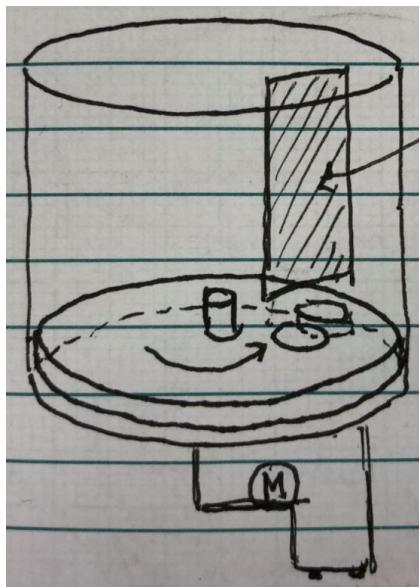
Drawing of the pill-dispensing cylinder. The motor attached to the bottom turns a disk, which contains a hold that can hold 1 pill at a time. When this hole lines up with a similar hole on the bottom, non-rotating disk, the pill is dispensed.
